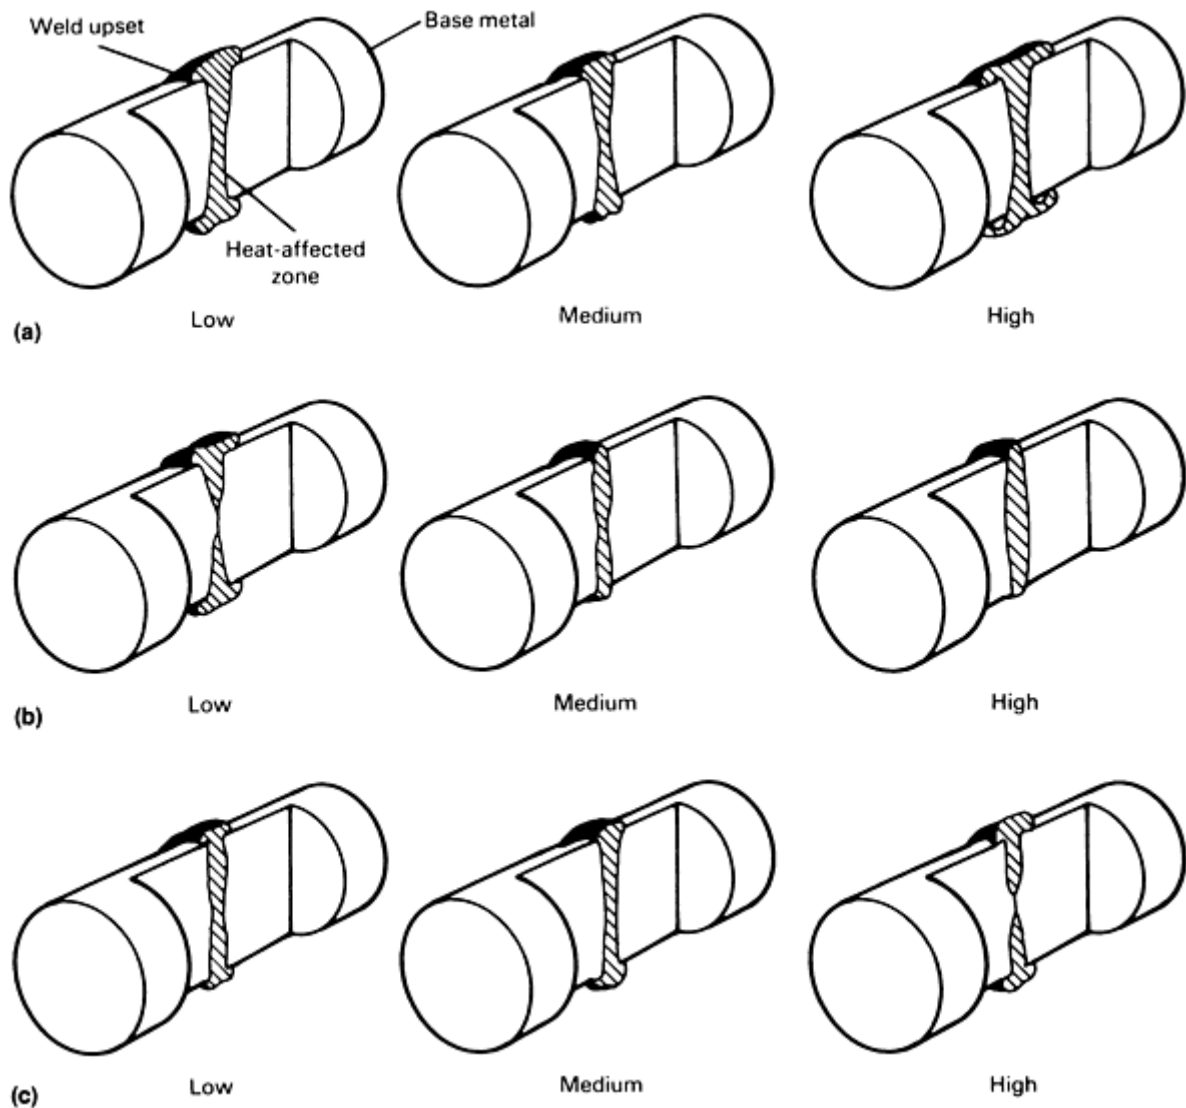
SCHEMATIC SHOWING EFFECT OF WELDING PARAMETERS ON THE FINISHED WELD NUGGET OBTAINED WHEN SIMILAR METALS ARE WELDED USING INERTIA-DRIVE FRW EQUIPMENT. (A) FLYWHEEL ENERGY. (B) INITIAL PERIPHERAL VELOCITY OF WORKPIECE. (C) AXIAL PRESSURE. SOURCE: REF 7
